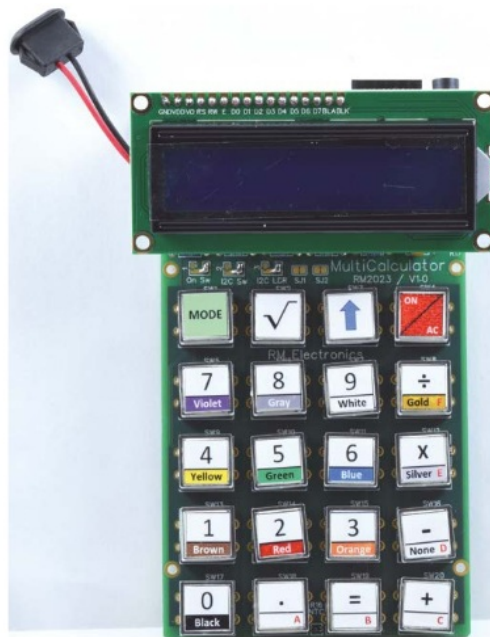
The display and the wired USB-C connector are fitted for testing the first prototype.
